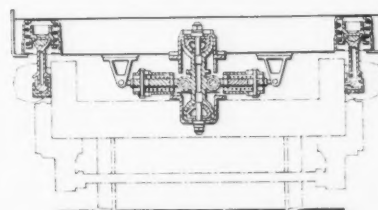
End view of the bogie central equipment showing the links attached to the locomotive frame
